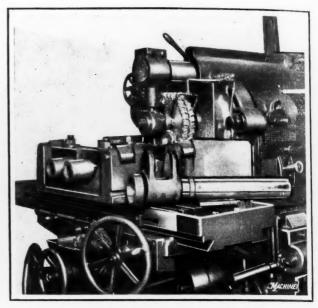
Rough- and Finish-milling the Inner Faces of the Lugs on the Rear Axle Sleeves
